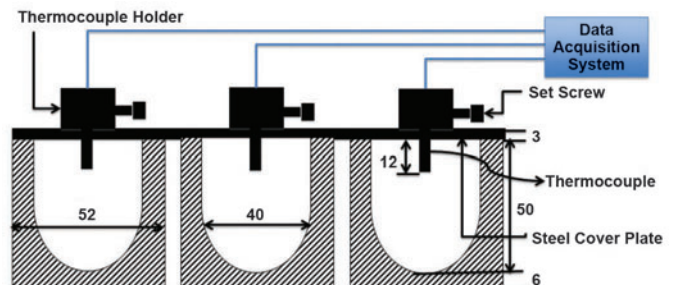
Casting set-up in graphite mold (dimensions in mm).
